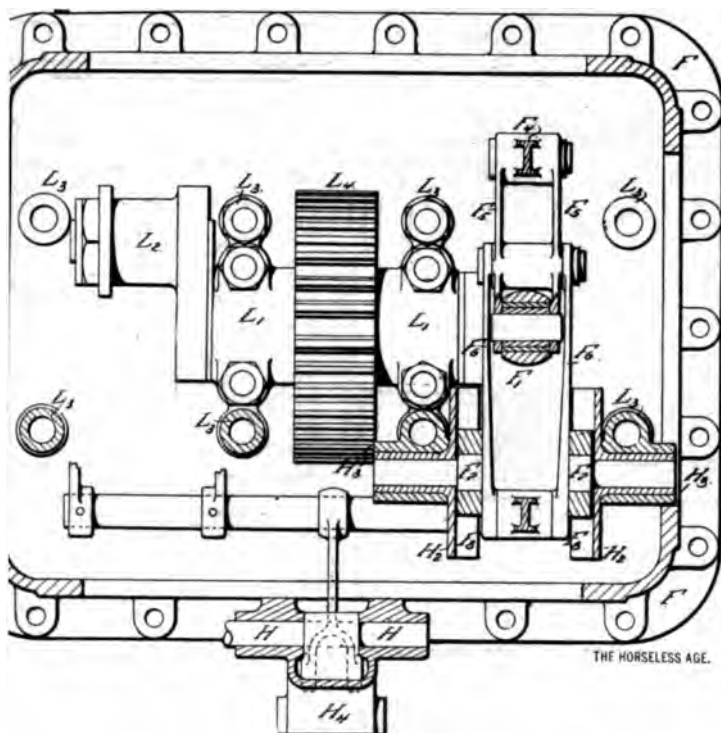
VIEW OF ENGINE CRANK SHAFT AND CASE.
